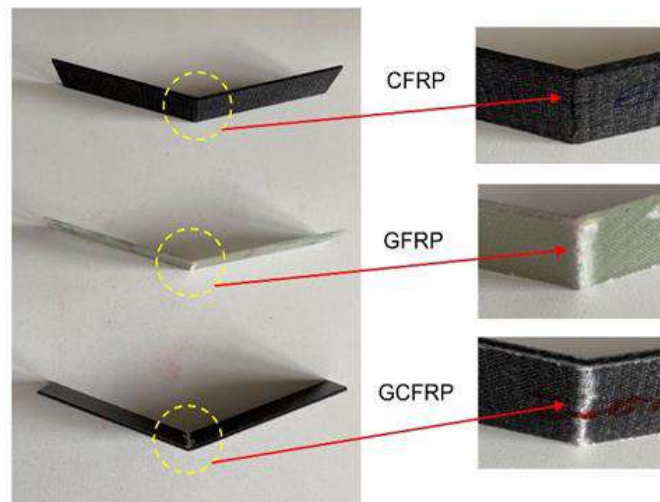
Fracture damage after bending test in CFRP, GFRP and GCFRP composites.
